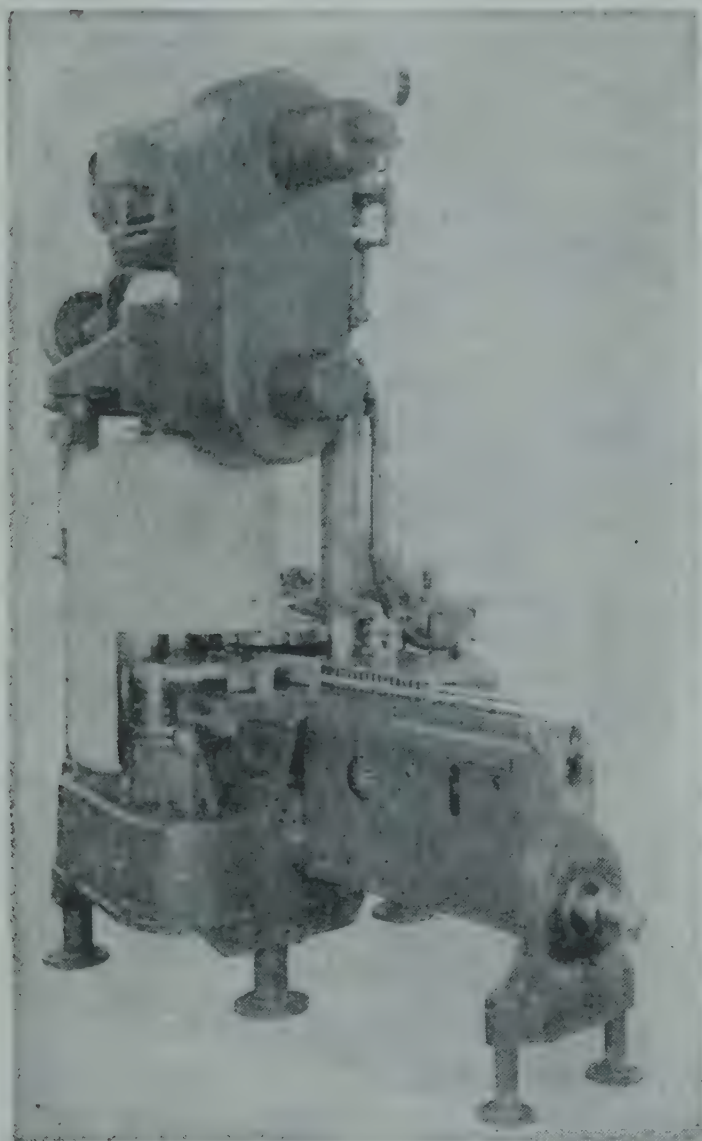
Modern double seamer (closing machine) for cans. No. 450-HCM high-speed closing machine; left-front view. (Continental Can Co., Inc.)
